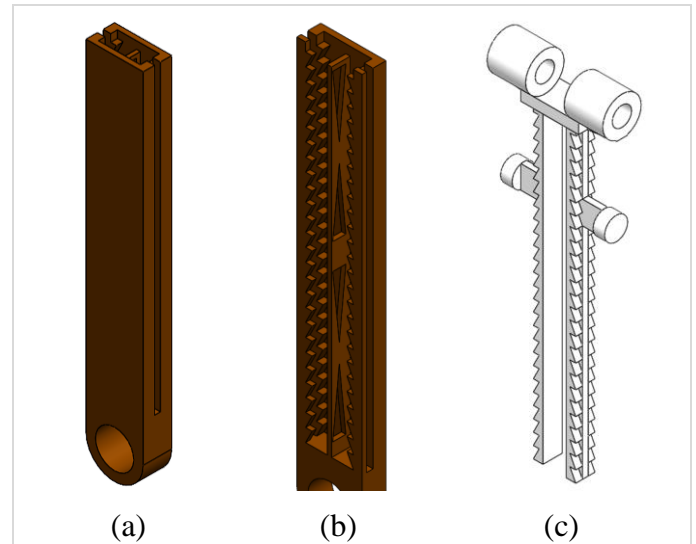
Isometric View of the Parts that Constitutes the Shoulder-Mandible Element. a- Outer Part of the Telescopic Adjustment; b- Cut View of the Outer Part of the Telescopic Adjustment; c- Inner Part of the Telescopic Adjustment
